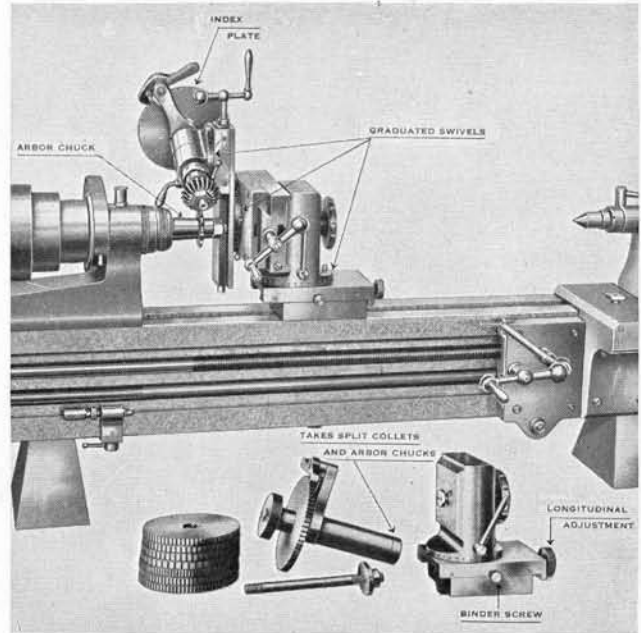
Rivett 608 (4 N.S.) lathe with Slide Rest Milling Attachment milling a bevel gear. Foreground view, attachment removed from lathe
